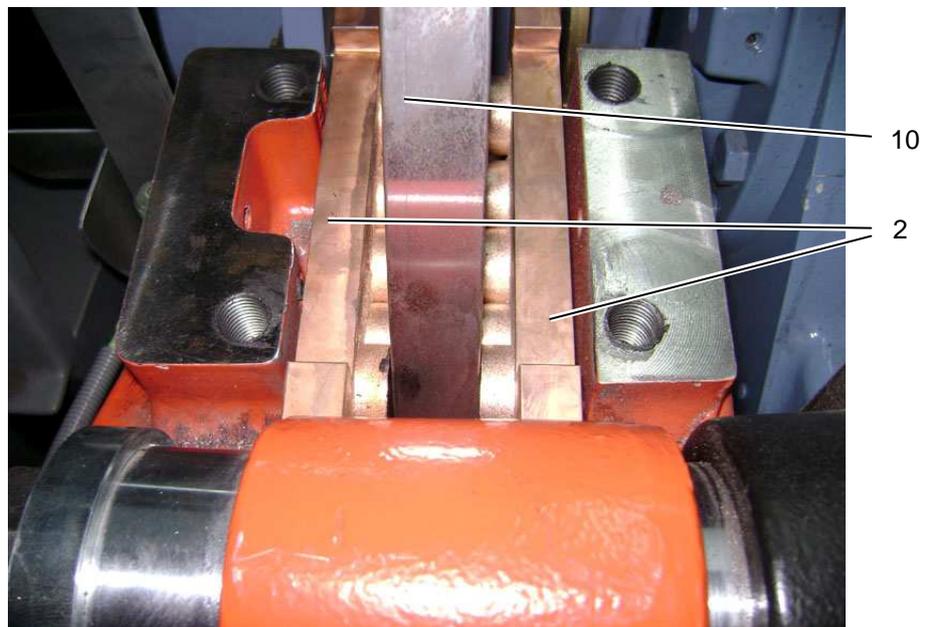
7 Rotor holding brake without pad holder
